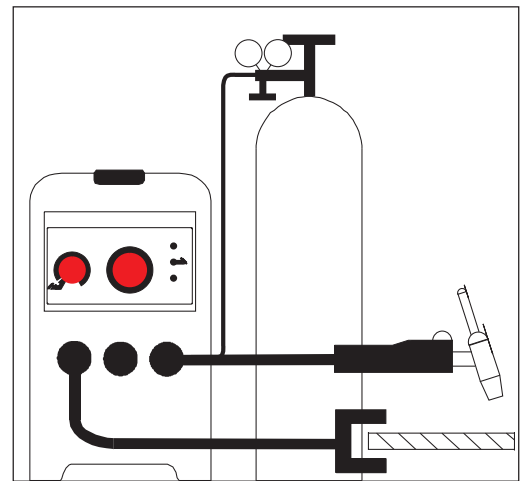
TP 2000 R.C. as a TIG welding unit
